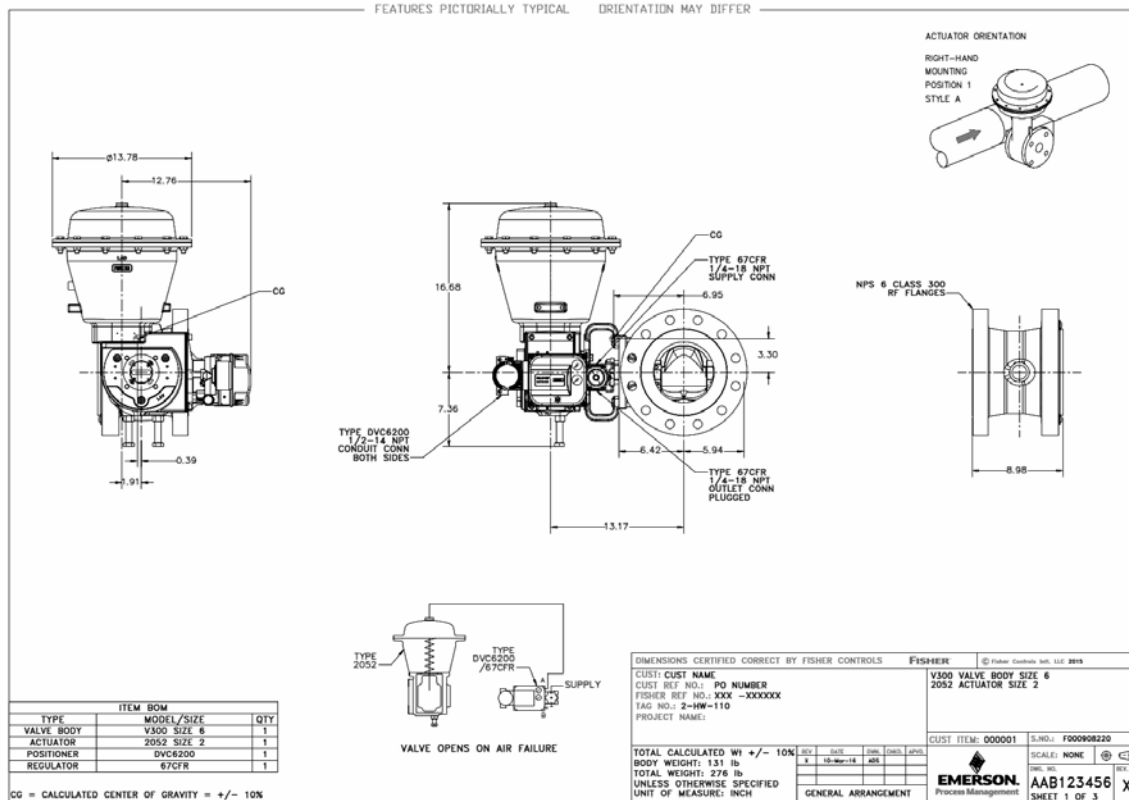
LEVEL 3 Drawing - Rotary (Sheet 3)
